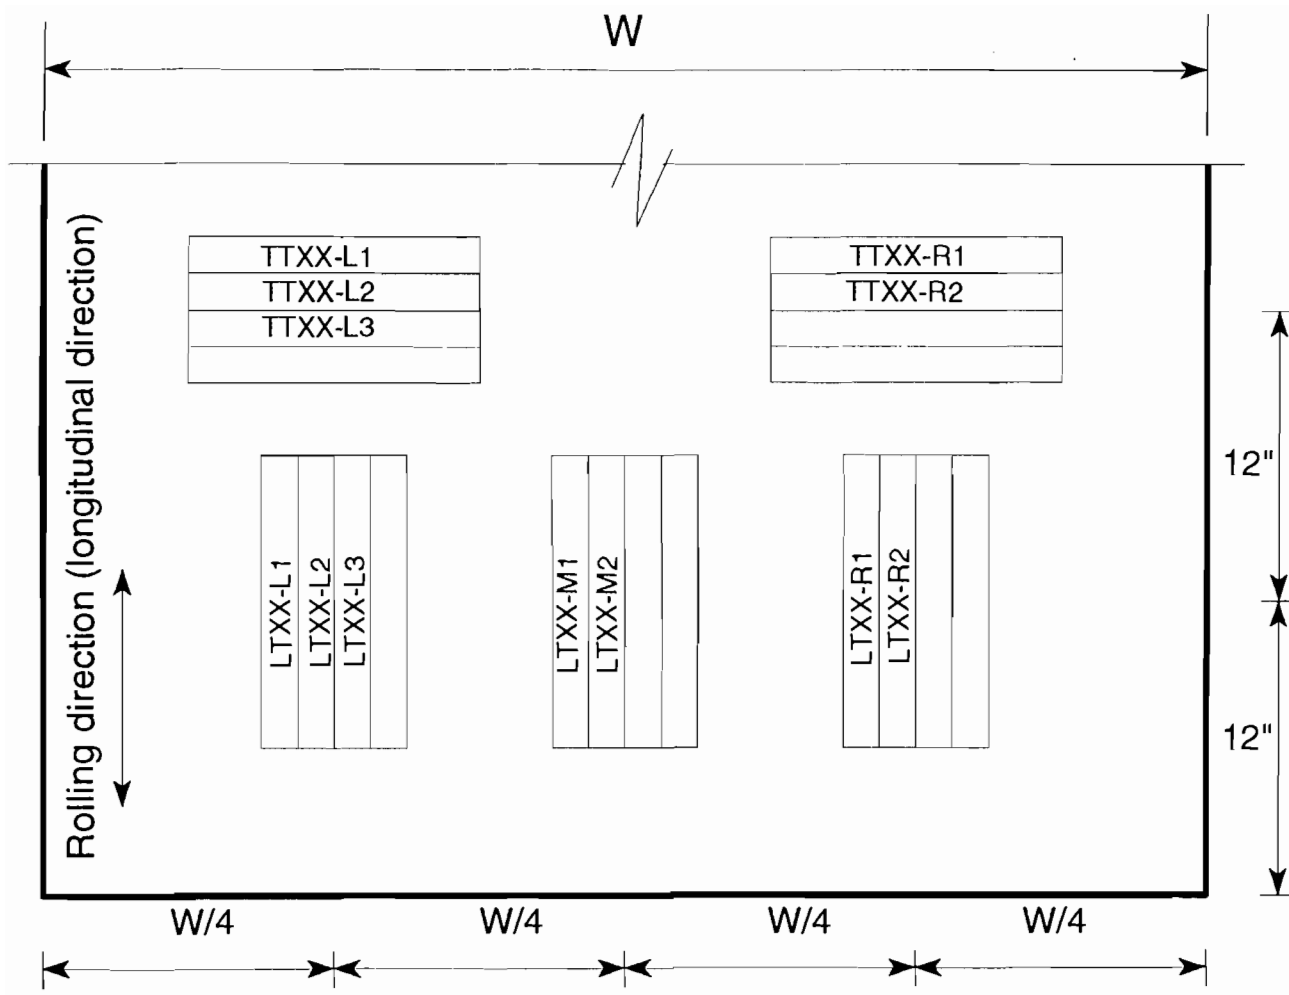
Layout of Coupons Cut from Virgin Steel Sheet
